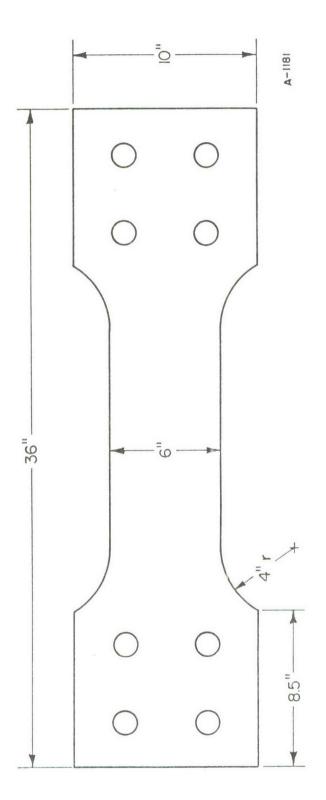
PLANFORM OF SURFACE FLAW TEST SPECIMEN
